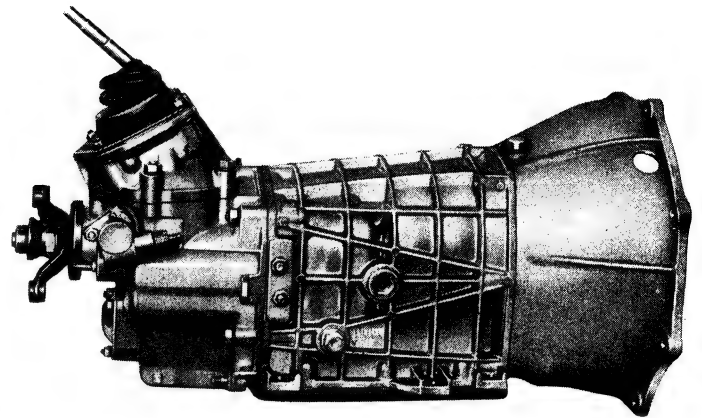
Right hand side view of 1600 S Cabriolet transmission assembly.
